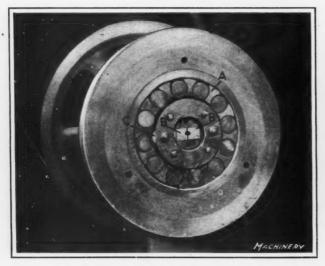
Swaging Machine with Cover Plate removed, showing Dies, Backers, Rolls, and Roll Plate
